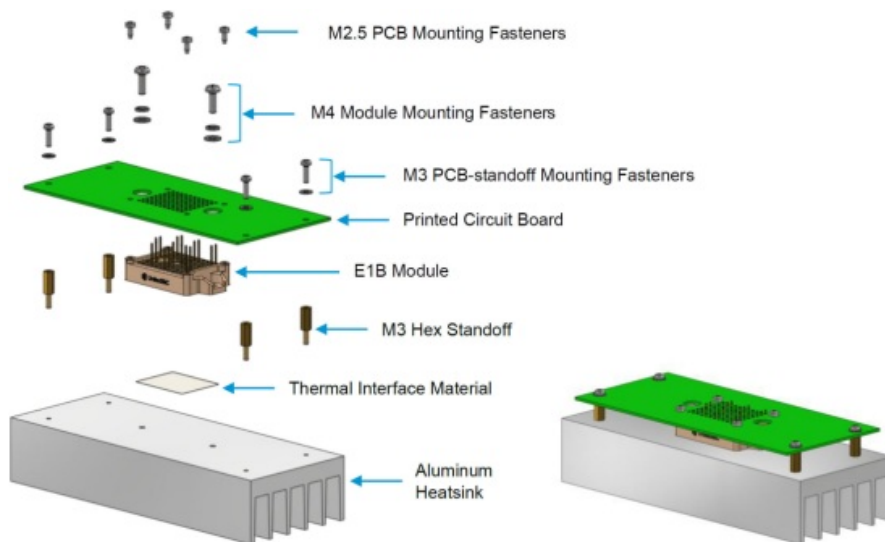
Module Mounting with PCB and Heatsink (Assembly Exploded View)
